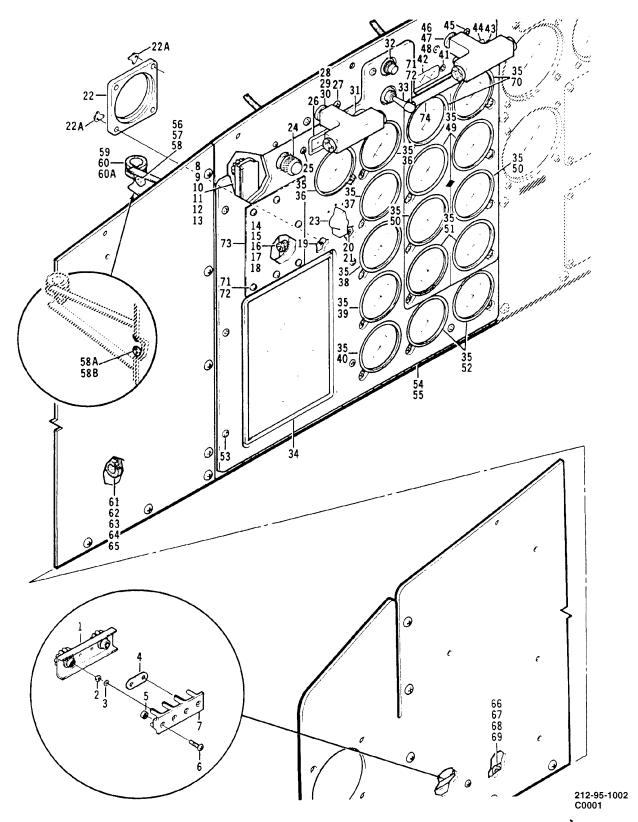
Panel assembly, instrument (30597 thru 30603, 30611 thru 31311, 35001 thru sub)
